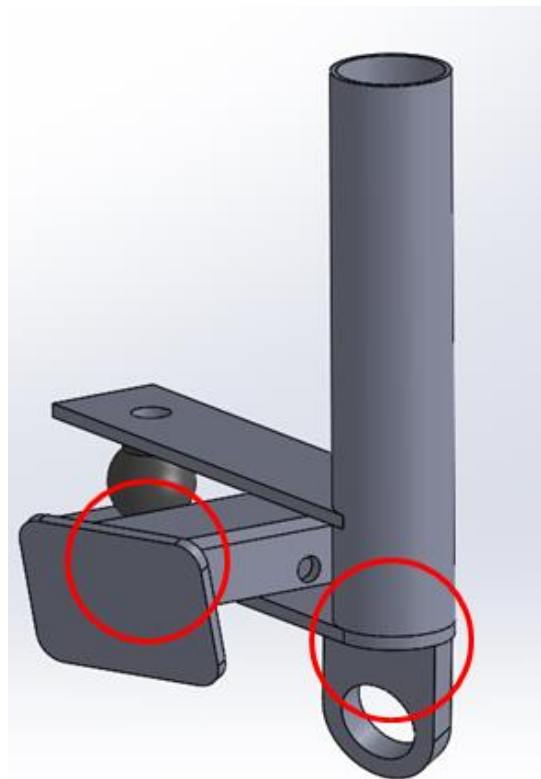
An initial design idea for the wheel axle and Ackermann connection. The red circles show parts that had complex angles; i.e. parts that had two different angles that had to be machined onto the same surface.
